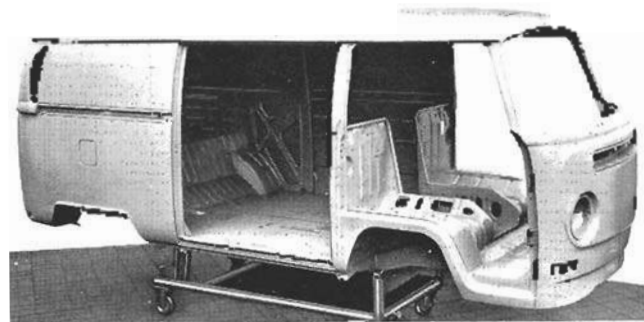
Type 2 body with steel frame. (Doors, windows, and various parts have not been installed.)
